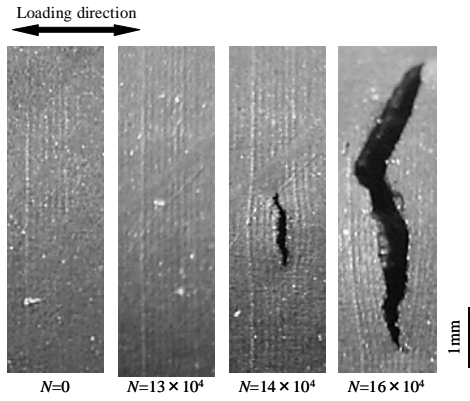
Fatigue crack of plain specimens and behavior of fracture surface in Test B.
